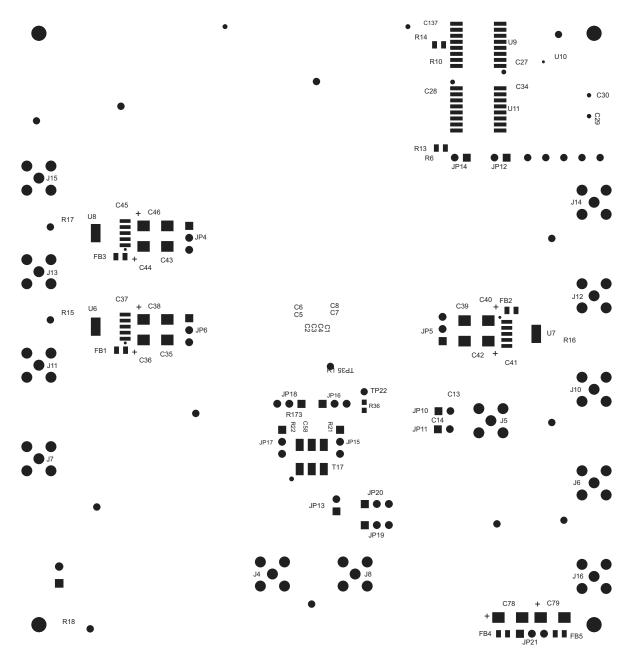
ADS5294EVM Bottom Layer Assembly Drawing - Bottom View
